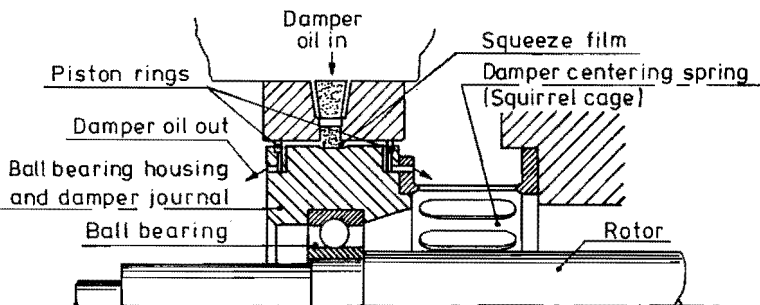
Bearing support with squirrel cage and squeeze film damper [7.3.].
